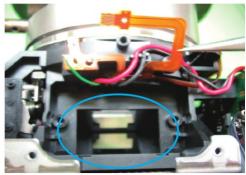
Auto Focus FPC Ass'y Assembly 1
